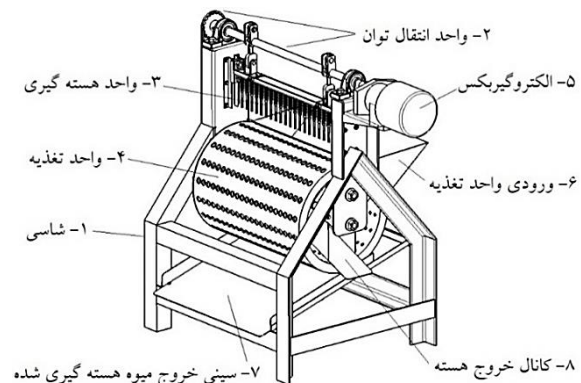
Isometric view of a Cornelian cherry pitting machine designed
